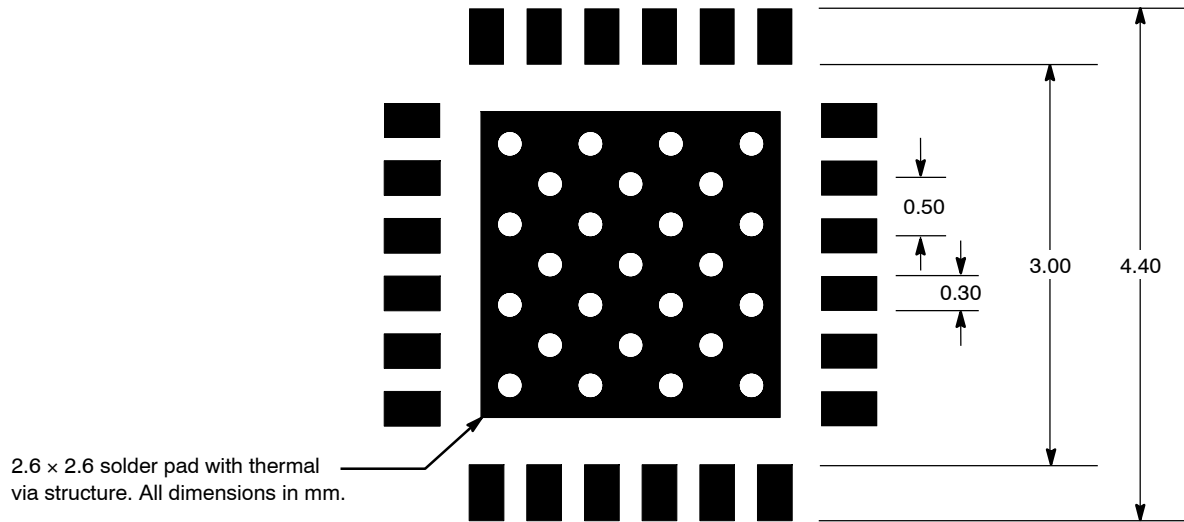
PCB Pad Layout for 24-Lead QFN 4 × 4
